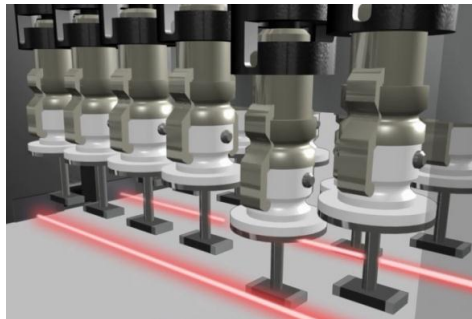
Head-mounted Side View Camera Concept in a Pick and Place Machine
